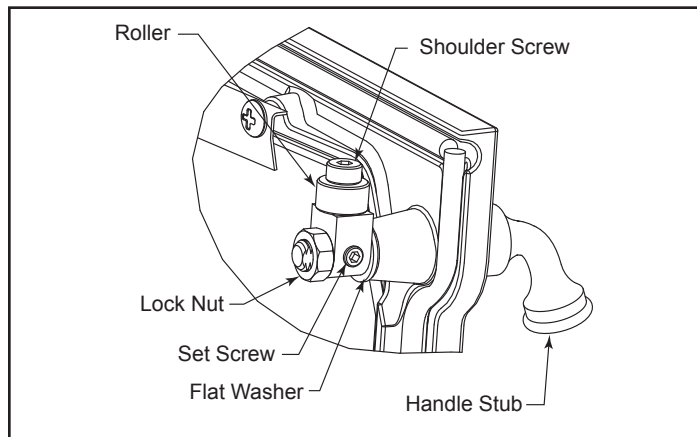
Rotate pawl and/or remove flat washer to adjust latch.
